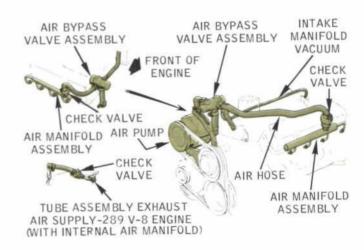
Typical Thermactor System Installation — V-8 Engine
